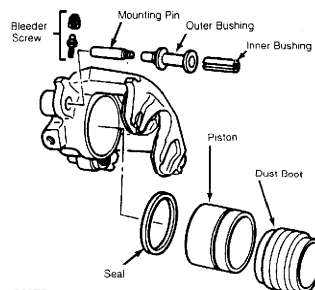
Caliper Assembly (Except Grand Wagoneer)
